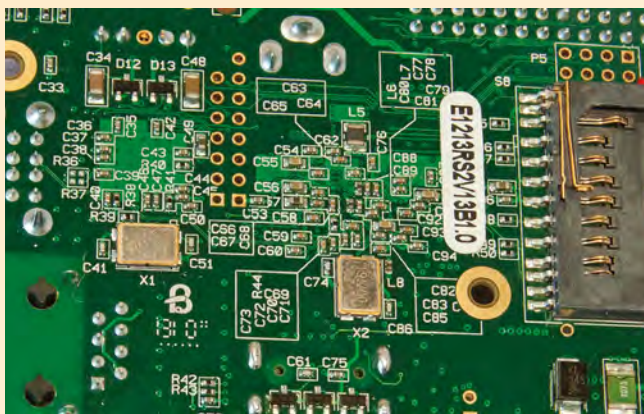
Part of a complex double-sided board that has components and tracks on both surfaces. Projects that use surface mounted components are not a good starting point
